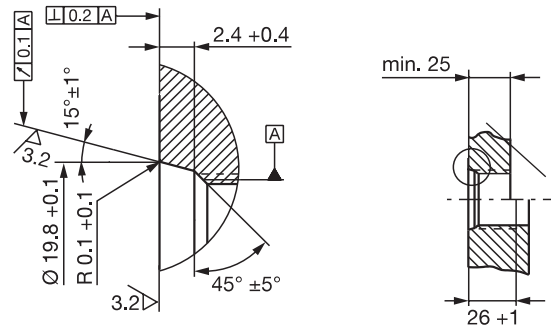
Mounting hole M18x1.5 per ISO 6149 O-ring 15.4x2.1
